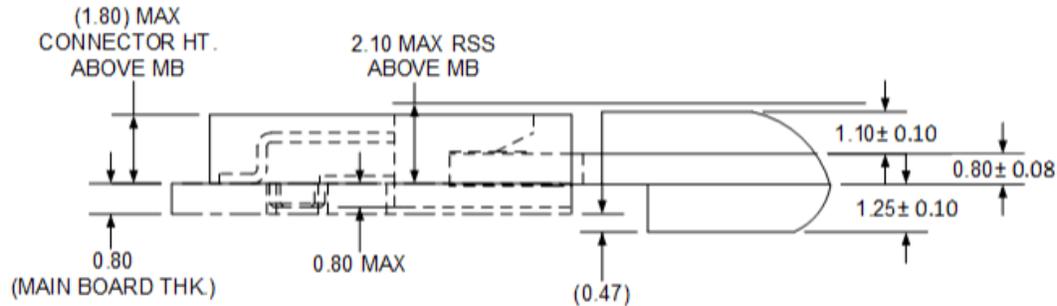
Stack-up Mid-mount (In-line) Double-sided (D1) Add-in Card for 1.2 Maximum Top-side Component Height
